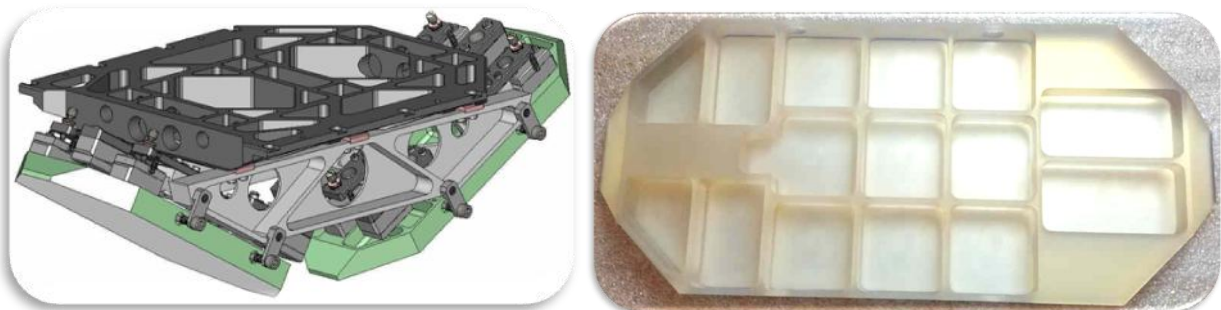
NESSI KM-1/3 assembly and back of as-built mirror.
